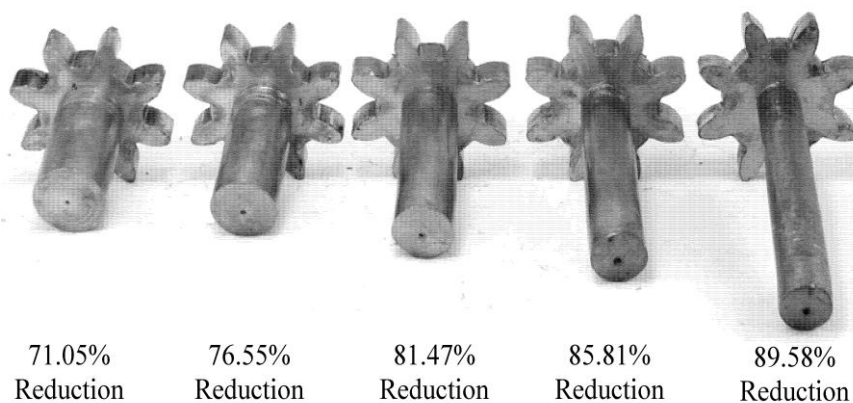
Extruded forward extrusion-forging 8-tooth gear head shaped product
